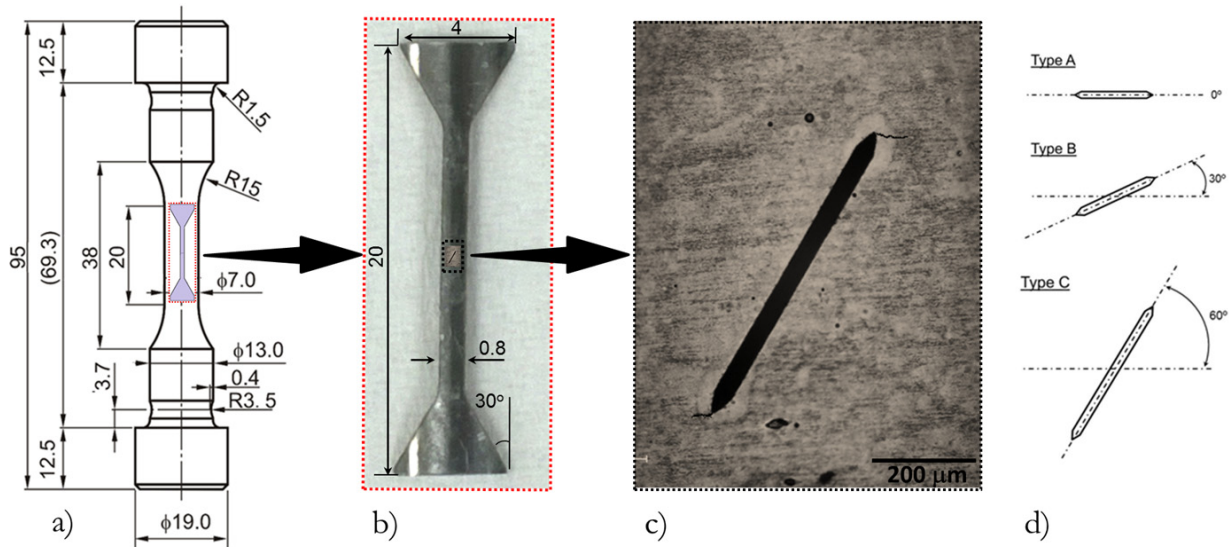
(a) Fatigue specimen (b) tomography specimen extracted from the fatigue specimen (c) notch and non-propagating cracks located in the small specimen (d) types of defects and tilting angles.
